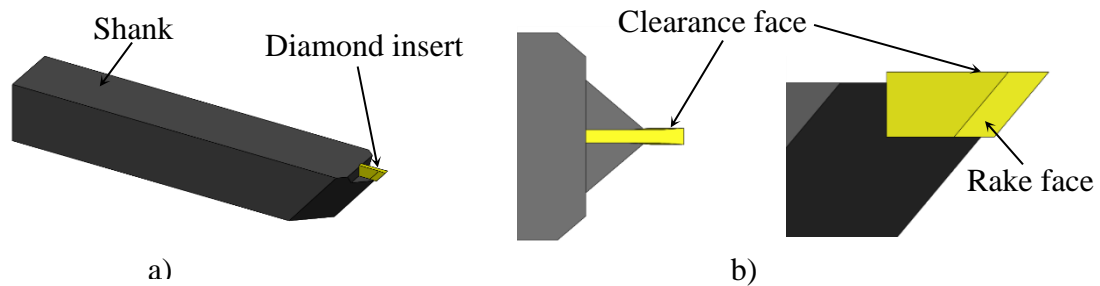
Design of the diamond cutting tool: a) overview of the cutting tool, and b) constructive detail of the tool tip
